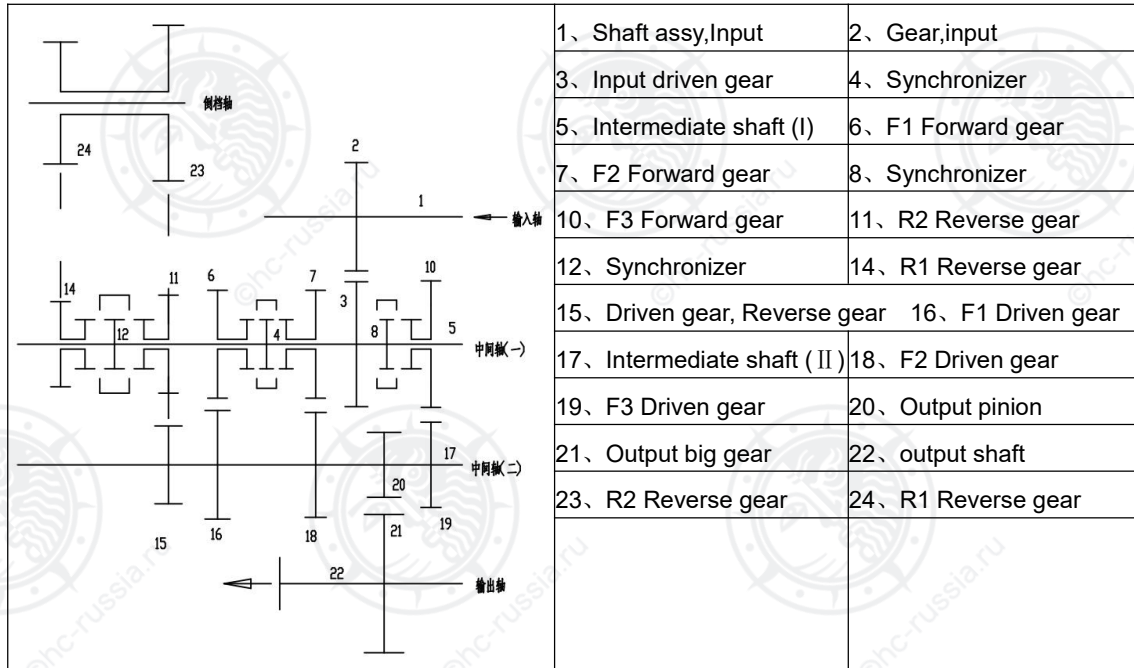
4-X5t Mechanical gearbox Transmit process
